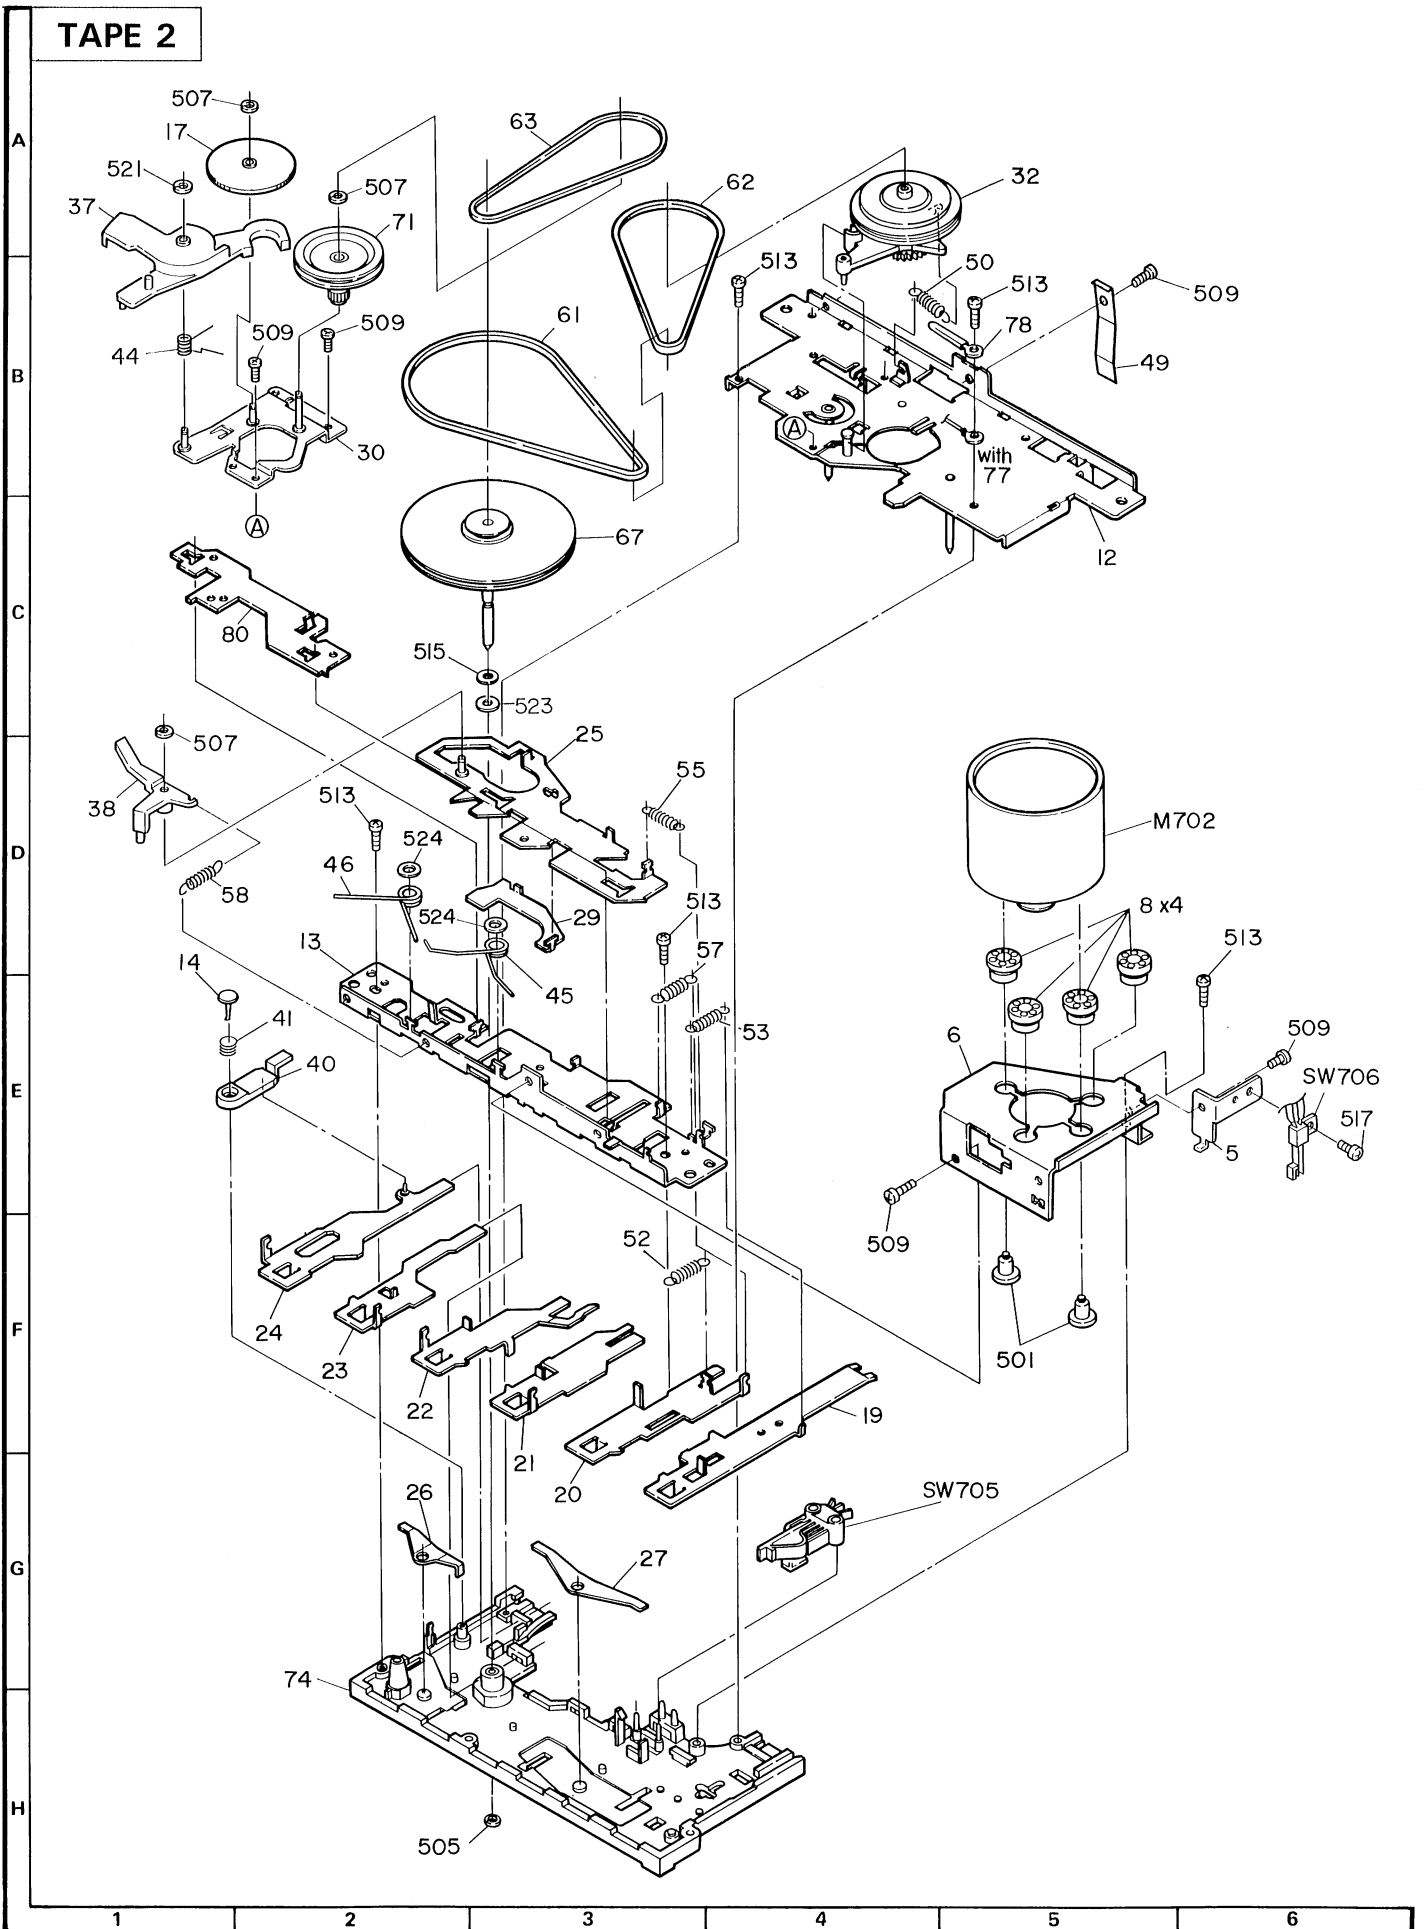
TAPE MECHANISM EXPLODED VIEW (4/4)
